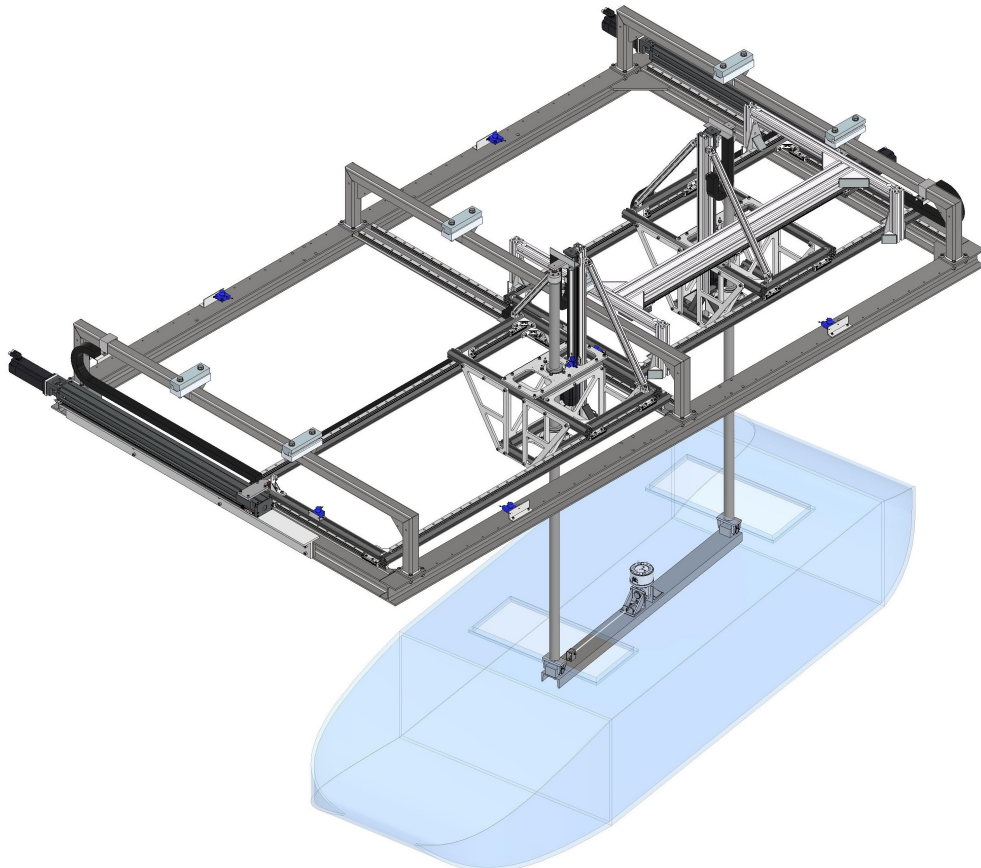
Dynamic test platform for AUV: CAD drawing of the final assembly.
